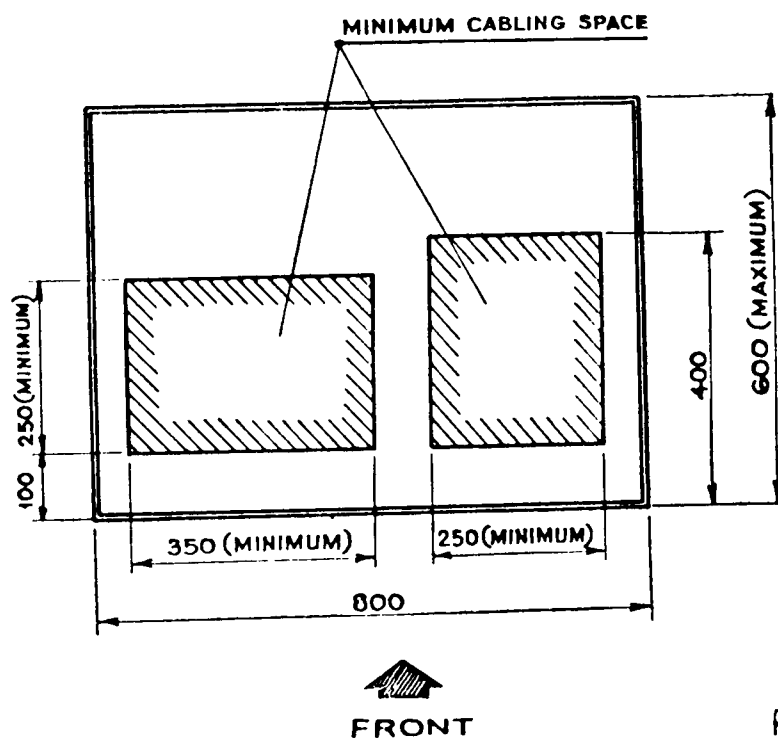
LIMITING DIMENSIONS FOR CABLE ENTRY
